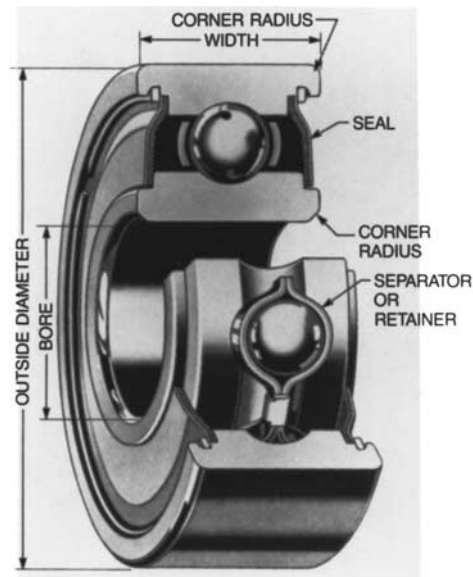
Photograph of a deep-groove precision ball bearing with metal two-piece cage and dual seals to illustrate rolling-bearing terminology. (*The Barden Corporation.*)
